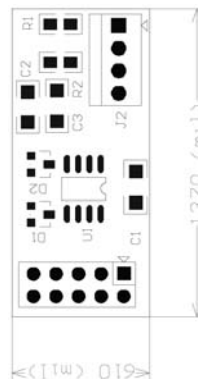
SSCBADC-ADDON Board Mounting Hole Outline
